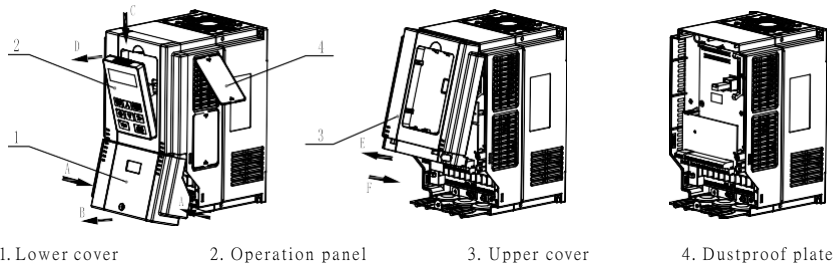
Removal and installation of drive components (Taking R4 as an example)
